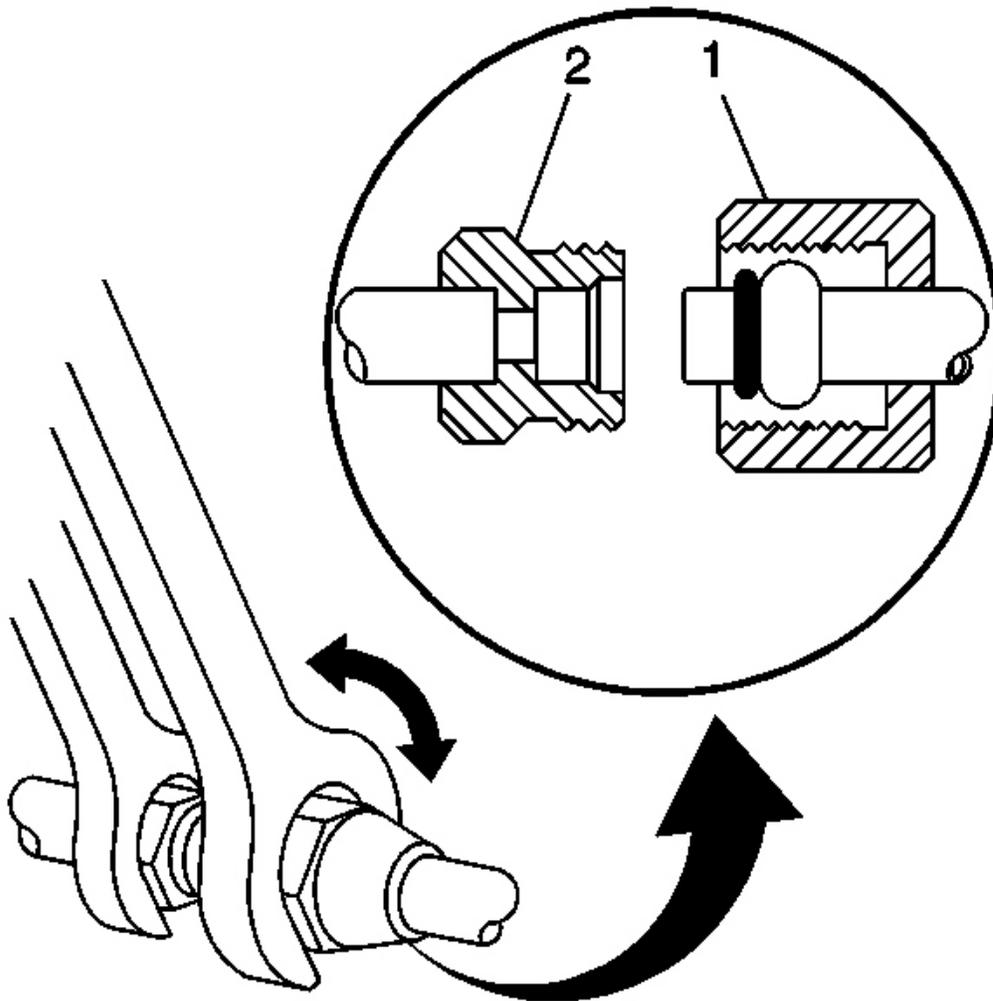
Disassembling/Reassembling A/C Line Fittings
